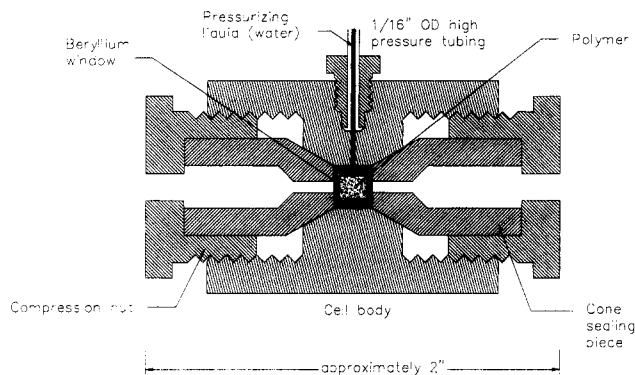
Side view schematic of the high-pressure cell (not to scale). The cell and cone seal pieces are machined from high-pressure steel; beryllium disks mounted on the cone seals permit the passage of X-rays through the cell. The sample is enclosed within a stainless steel tube contained within the cylindrical volume at the center of the cell. The entire assembly rests within a brass block which is maintained at a temperature between 0 and 185 °C by a set of thermoelectric units attached to the face of the block.
